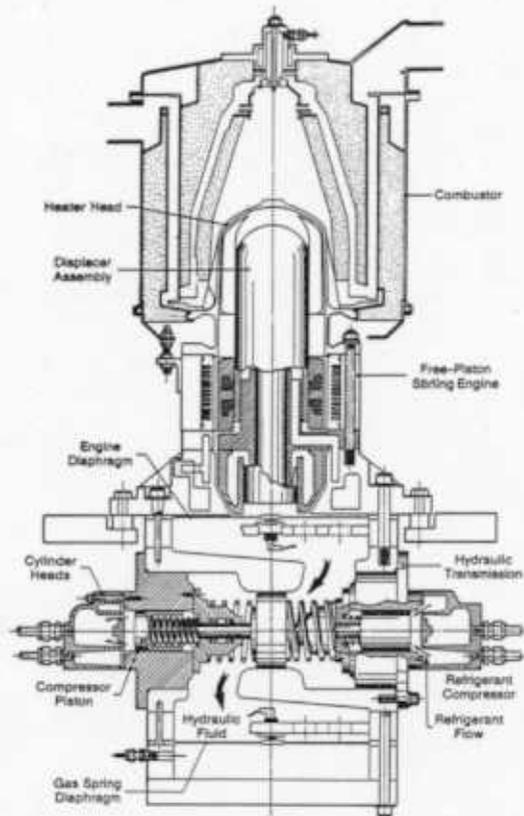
FPSE heat pump power module with new direct-drive hydraulic transmission and compressor
